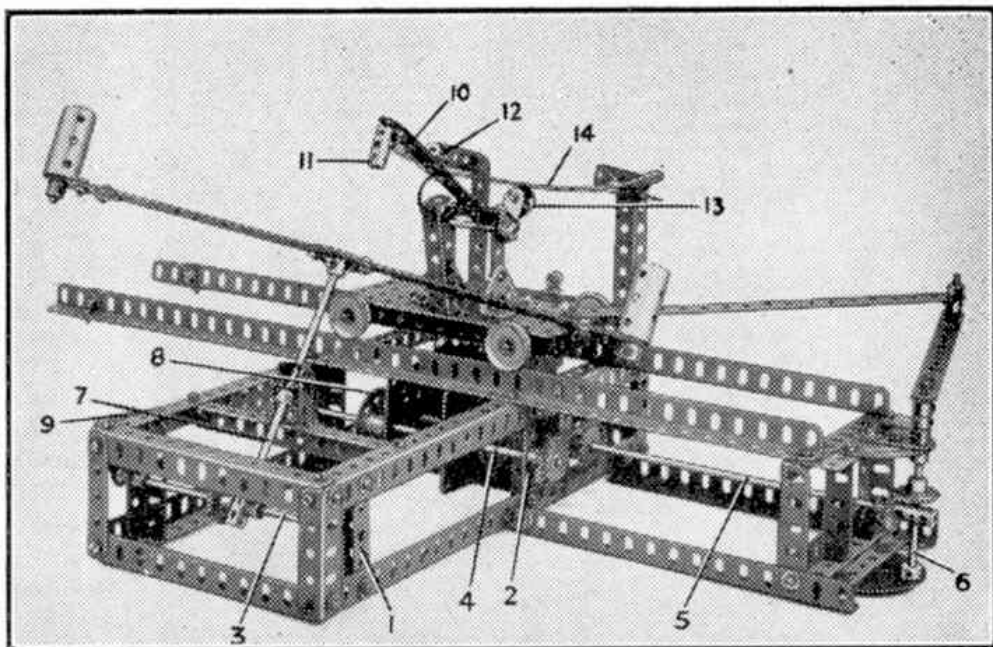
A useful wool-winding machine that is interesting to construct and operate.
